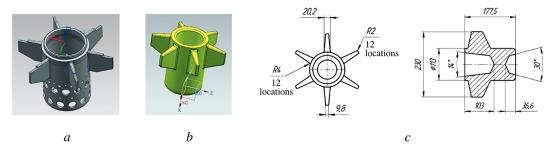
Nozzle part (a), model (b), and drawing (c) of the stamping.
